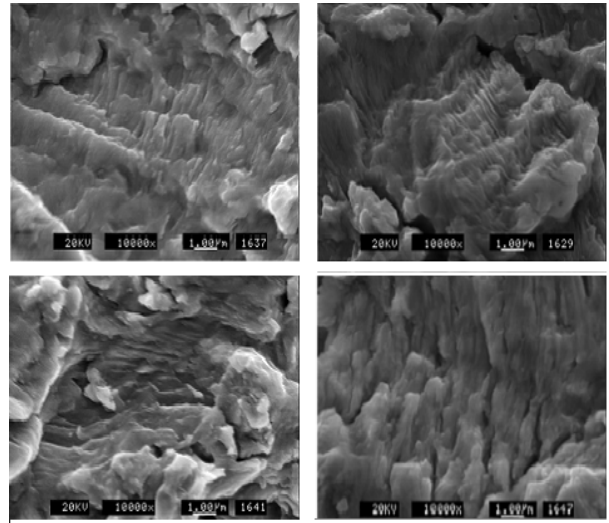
Fatigue fracture surfaces of base and welded metals (QLT)
